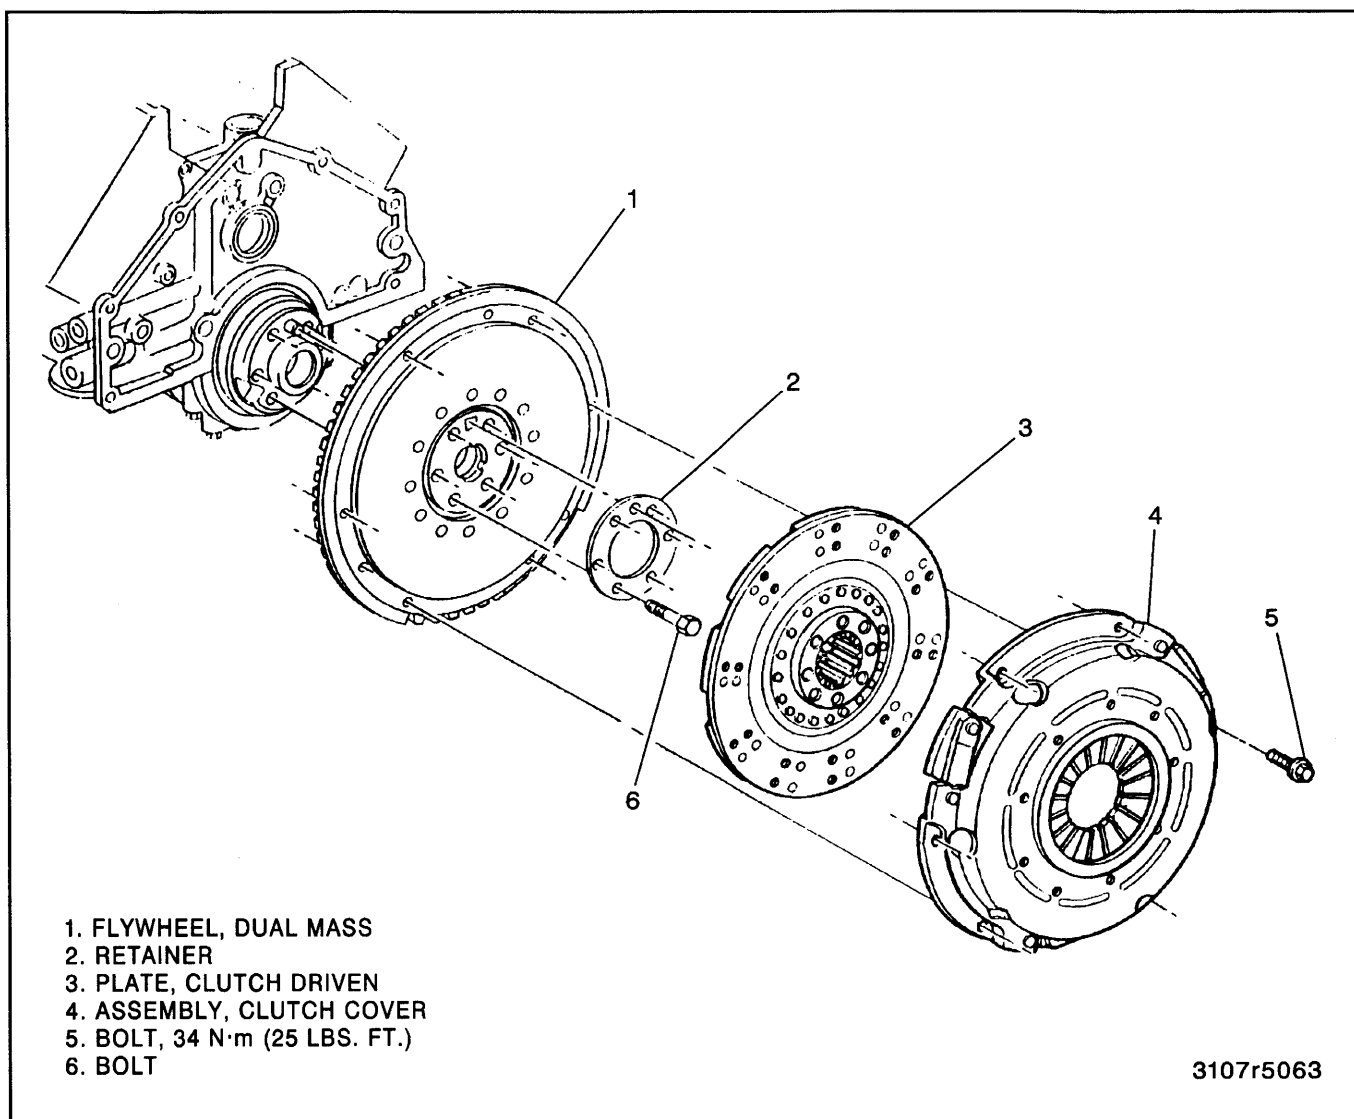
Clutch Assembly (Dual Mass Flywheel)
